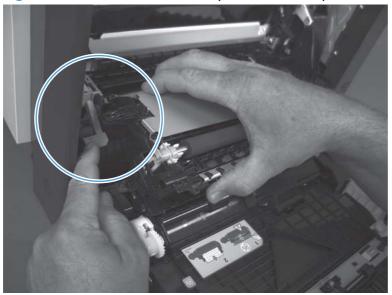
Remove the secondary transfer assembly (3 of 3)
